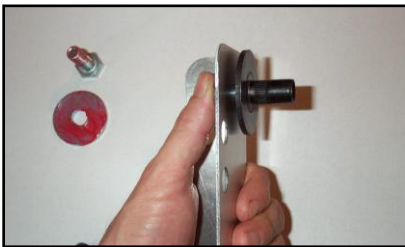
Thread one of the large black rivnuts onto the greased bolt
